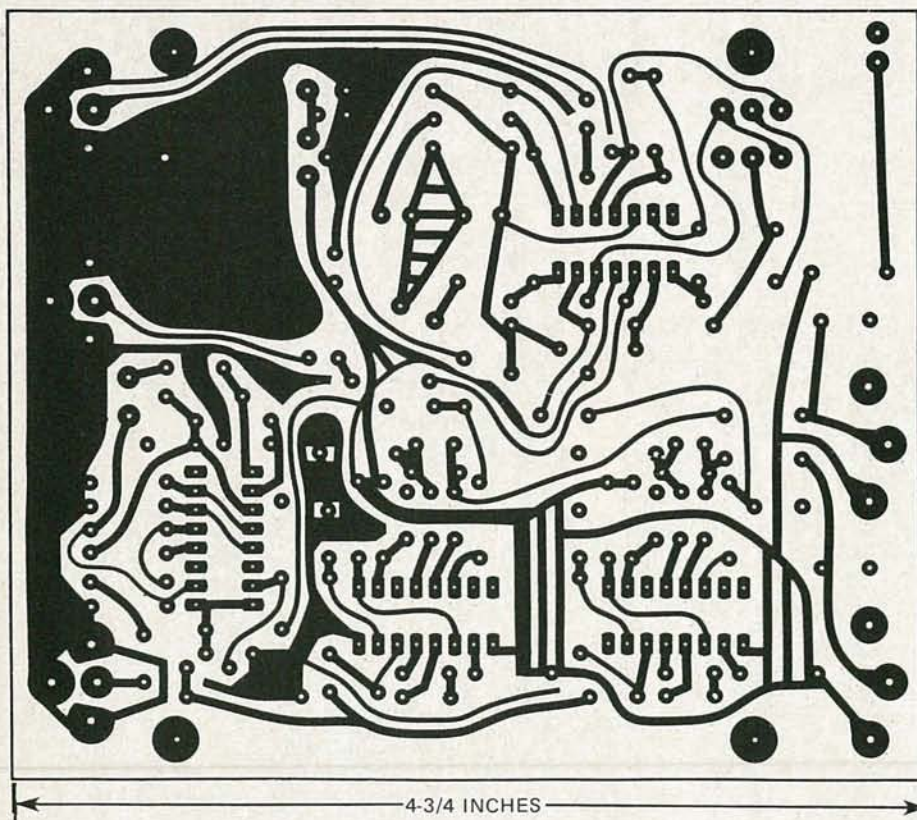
SOLDER SIDE of the demodulator's circuit board.
